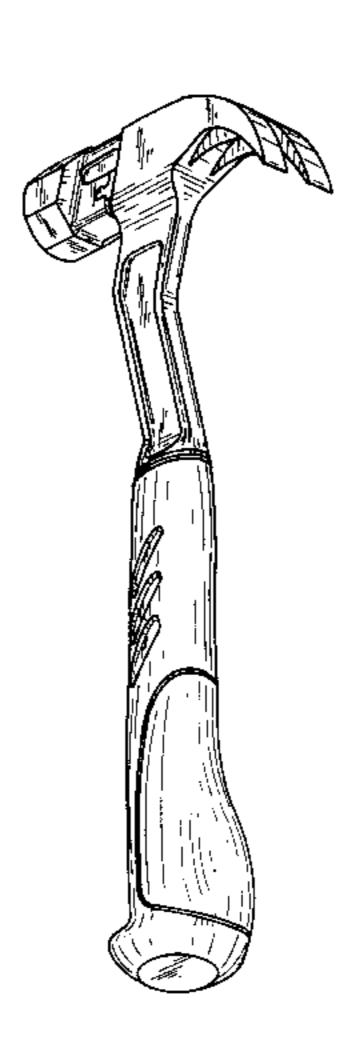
is a side view illustrating the claw hammer of the present invention;
